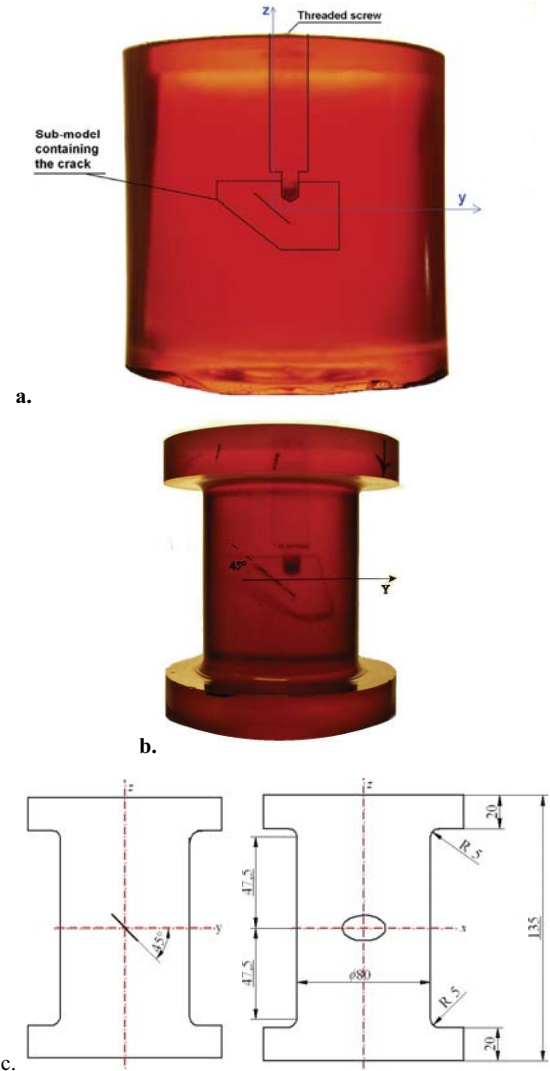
Global cracked model after the second casting (a.), tool-machined (b.) and final dimensions (c.).
